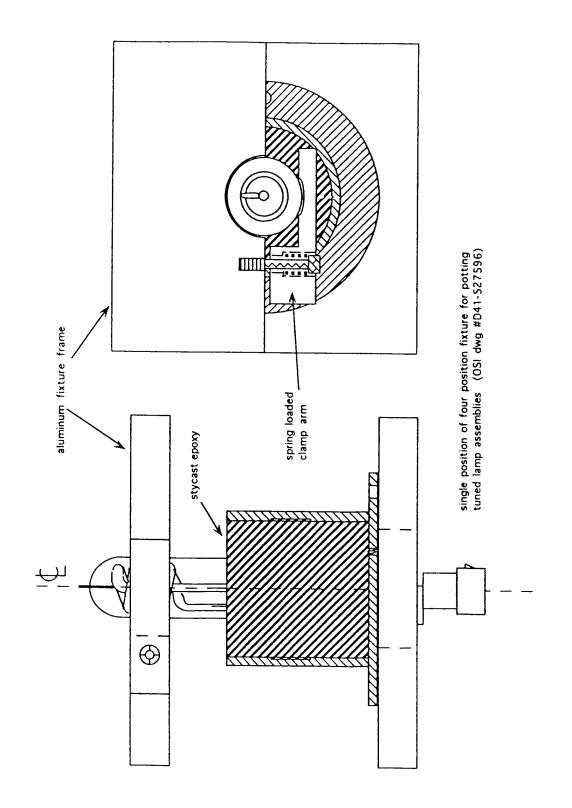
Mounting Arrangement for Potting Lamp into Lamp Base
